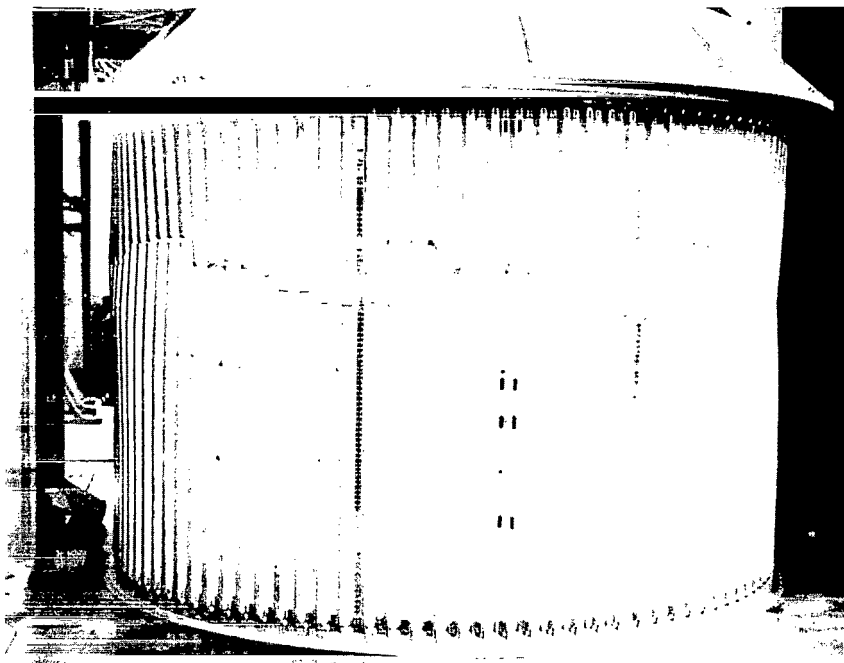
GENERAL INSTABILITY FAILURE, CYLINDER NO. 4
